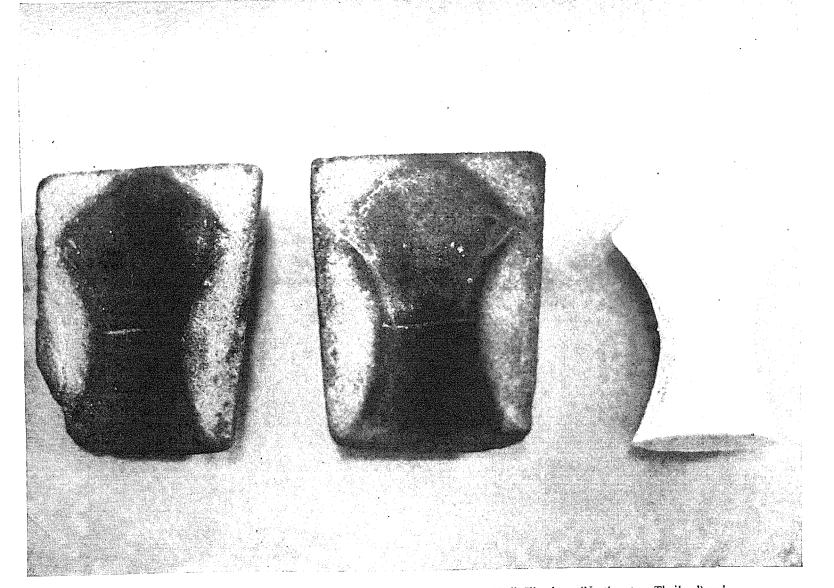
Plate I The casting faces of a sandstone mold found in excavation at Ban Nadi, Khonkaen (Northeastern Thailand) and a plaster cast made from this mold.
